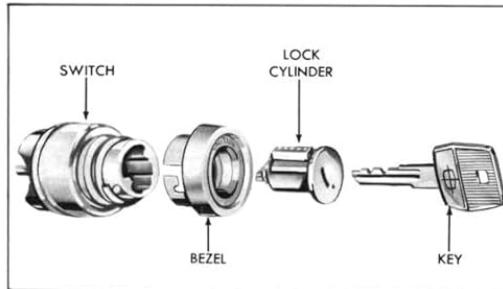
E-8. Ignition Switch and Related Parts—(61LM-7636)
